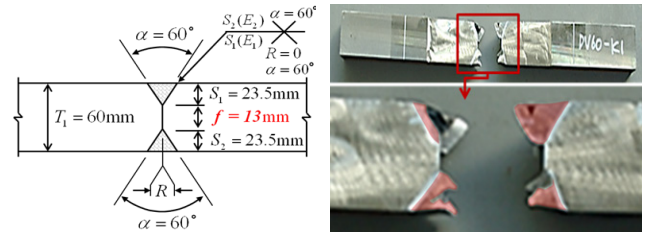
PJP weld details and fractured specimen - weld rod B and double V-groove 60° used
